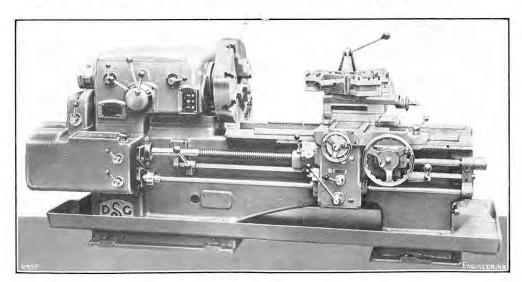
17-In. Swing Tool-Room Lathe; Dean, Smith and Grace, Ltd.
